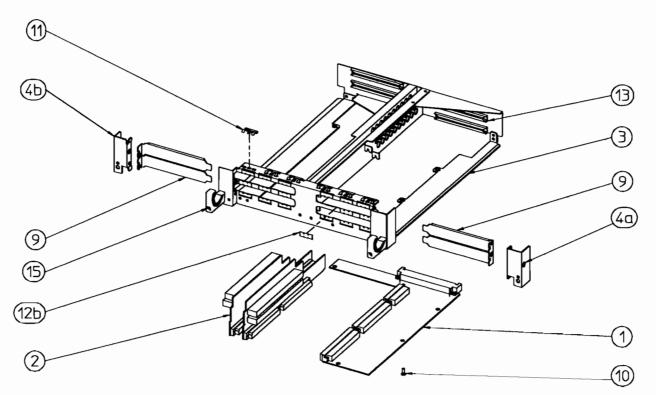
Model 745i Workstation EISA Module Exploded View
